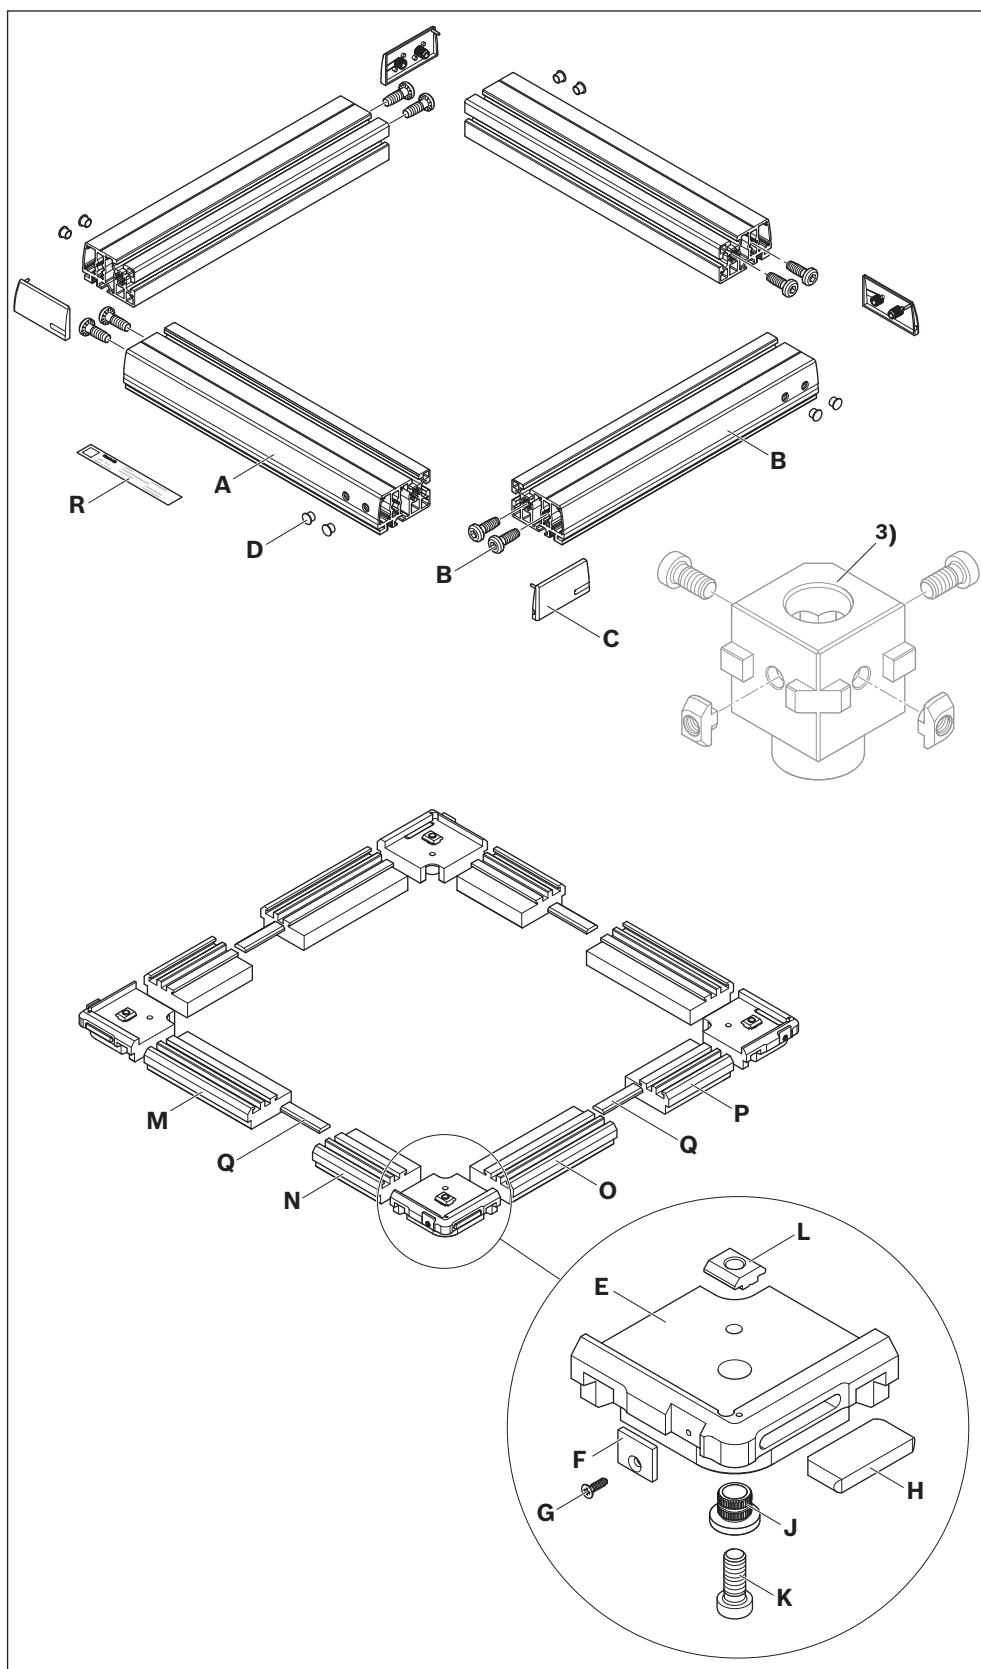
Scope of delivery Workpiece pallet WT 2/F-H
